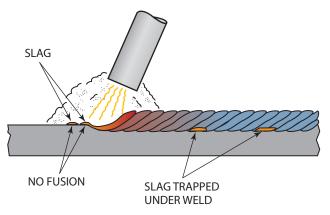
Some electrodes, such as E7018, may not remove the deposits ahead of the molten weld pool, resulting in discontinuities within the weld.
